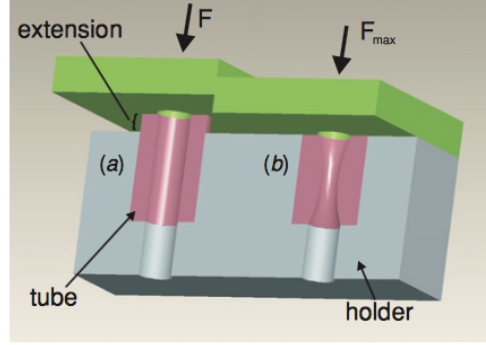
Cross-sectional schematics of a tube-sealing interconnection. On the left, before being compressed, the tube length exceeds the hole's depth. On the right, the sealing is achieved by compressing the tube into the hole, squeezing the central opening to ensure a leak-free connection [20].
